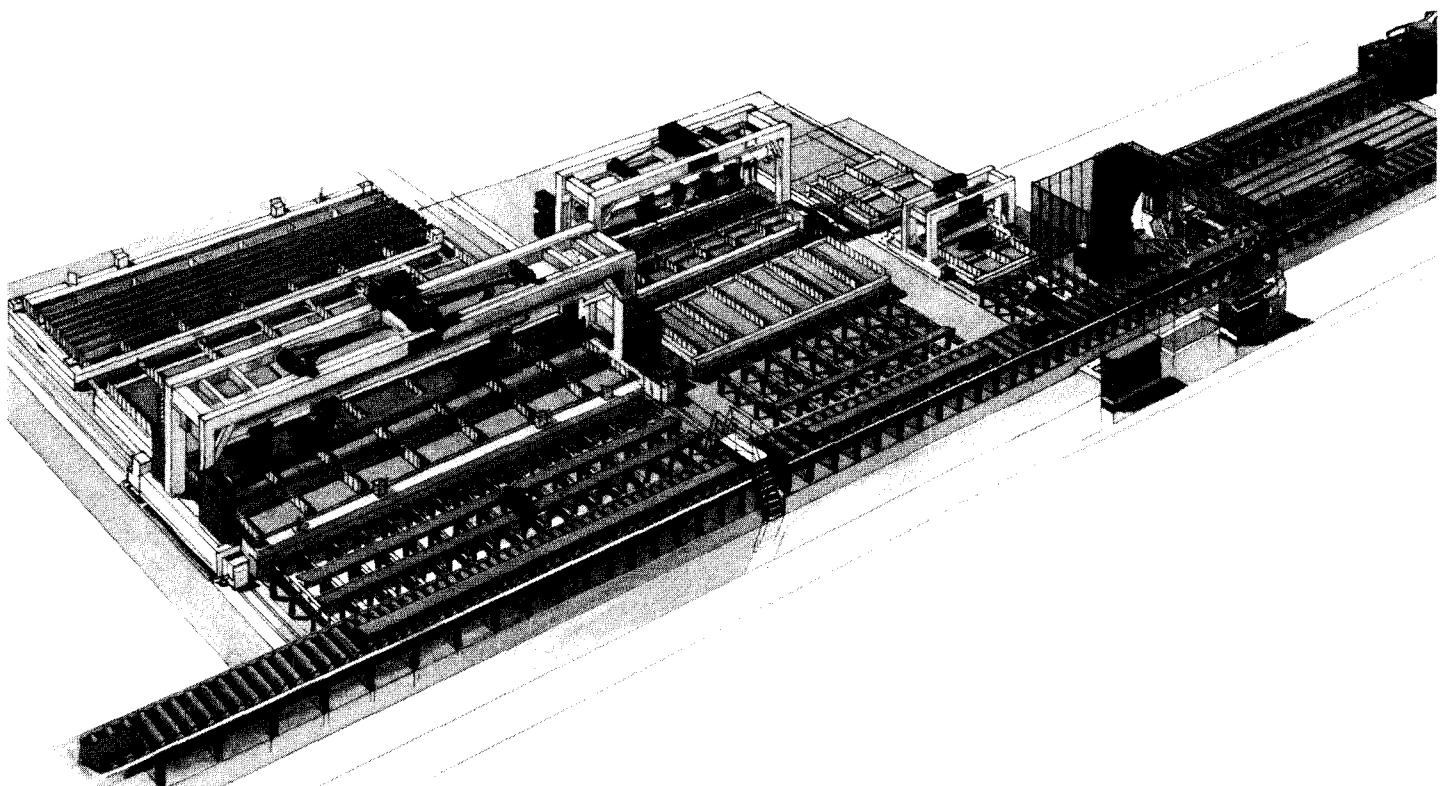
Profile Cutting and Marking Robotic Processing Line
